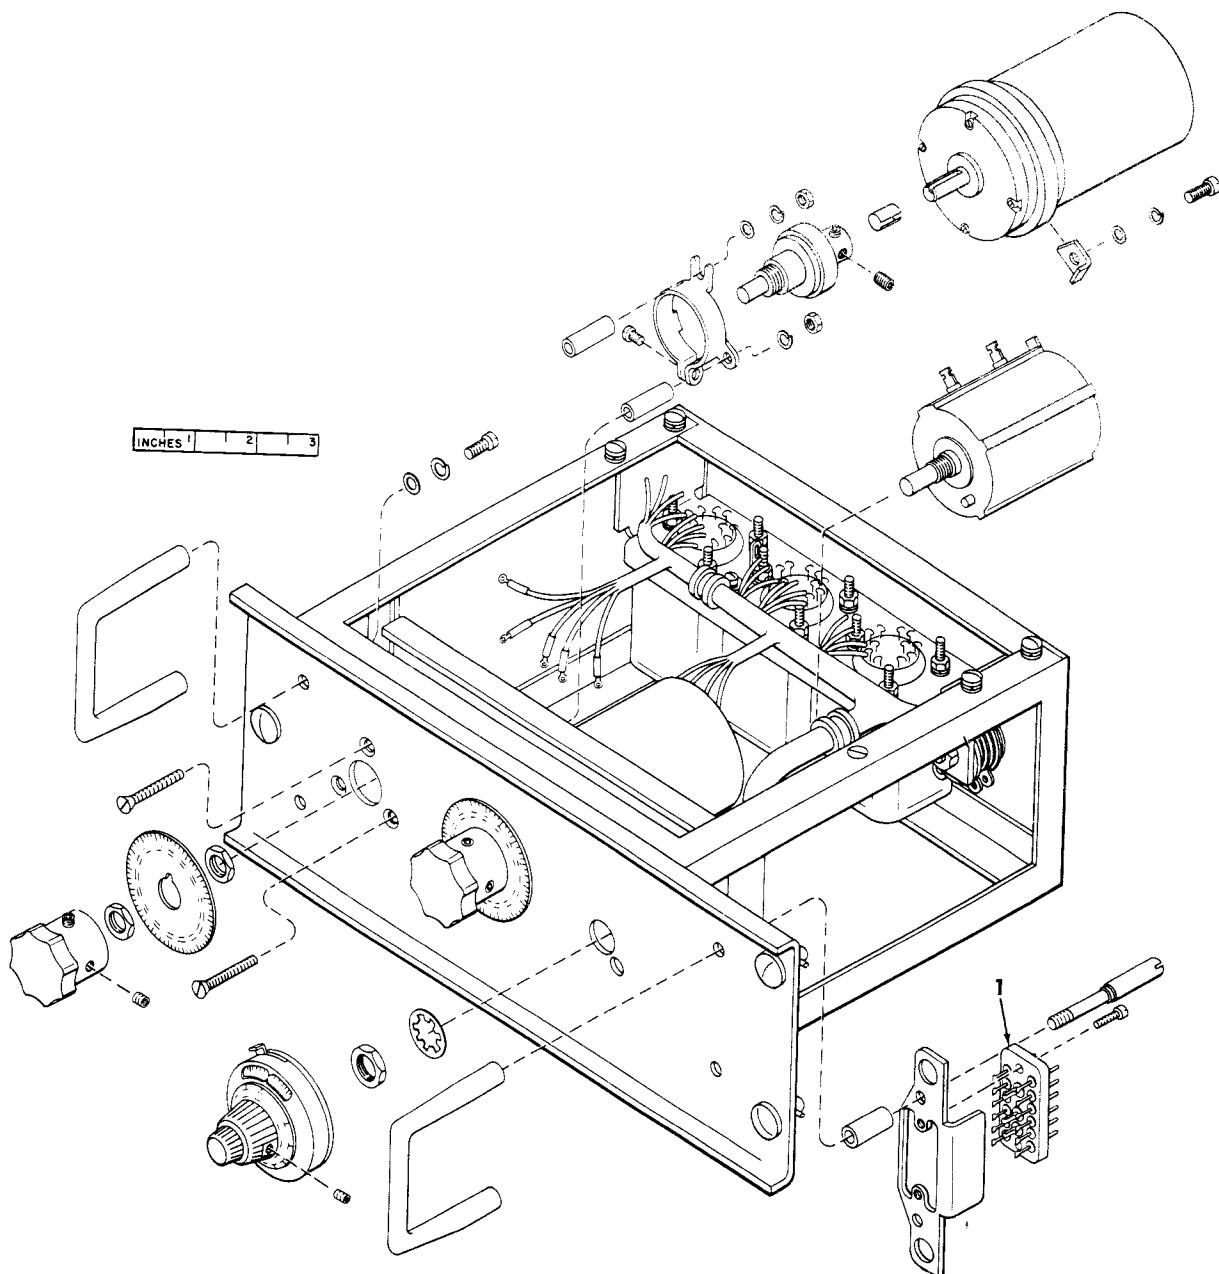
Amplifier, electronic control (8517944)—partial exploded view
